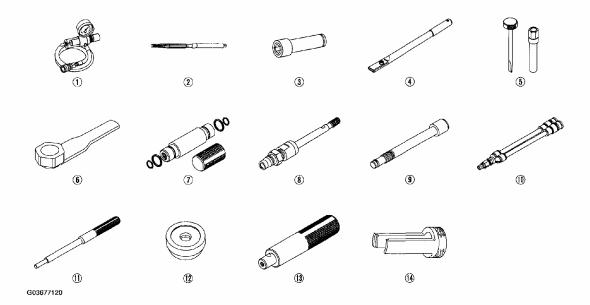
View Of Special Service Tool And Description Chart Courtesy of AMERICAN HONDA MOTOR CO., INC.
